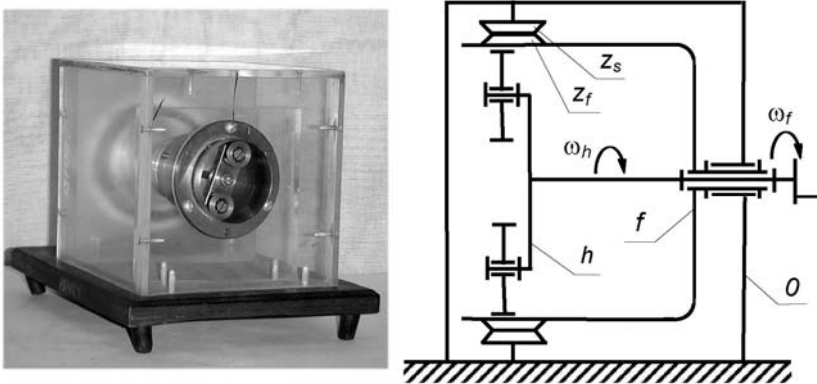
The harmonic drive with a flexible-glass and a double-roller wave generator
